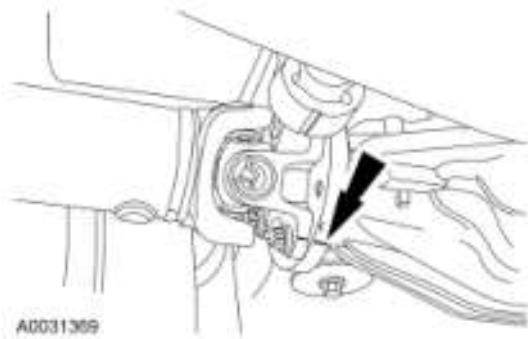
Locating Driveshaft Flange To Pinion Flange Index-Mark
